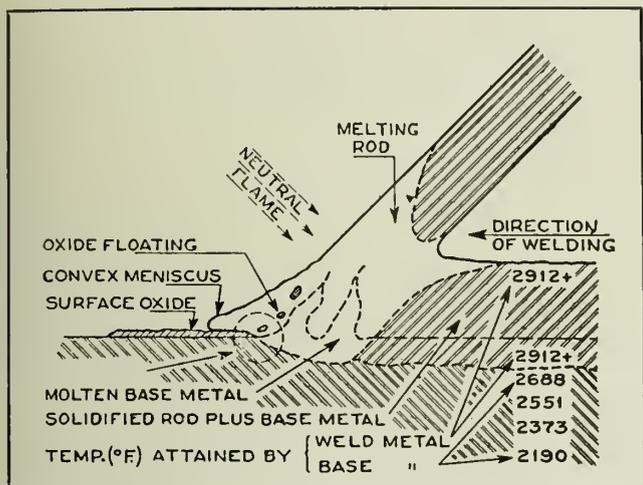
Diagrammatic Sketch showing roughly what takes place during Neutral Flame Welding.
